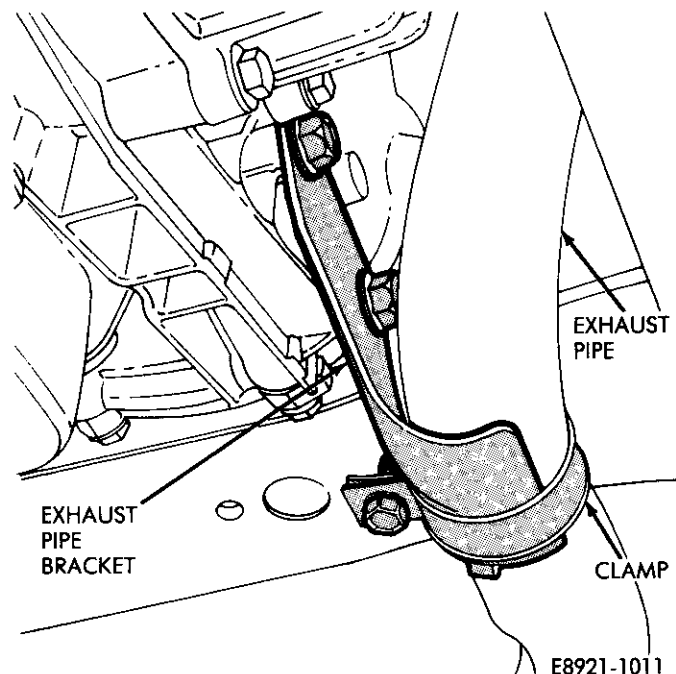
Exhaust Downpipe-to-Clutch Housing Bracket
